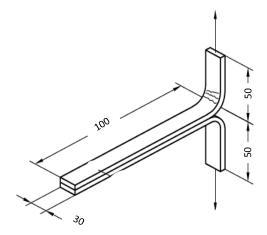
Adhesive joint for peel test (dimensions in millimetres)
